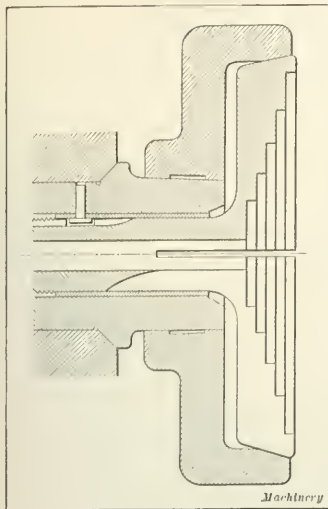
Large "Wheel" Type of Chuck for holding Disks
